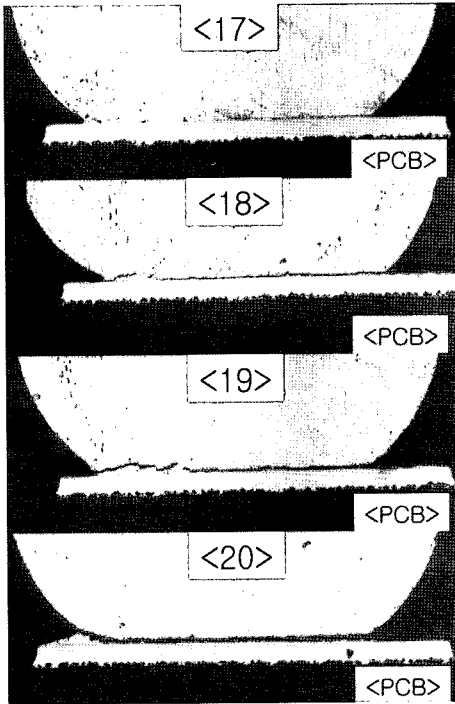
Comparison between the crack length of solder joints in the SnPb-PBGA package.
